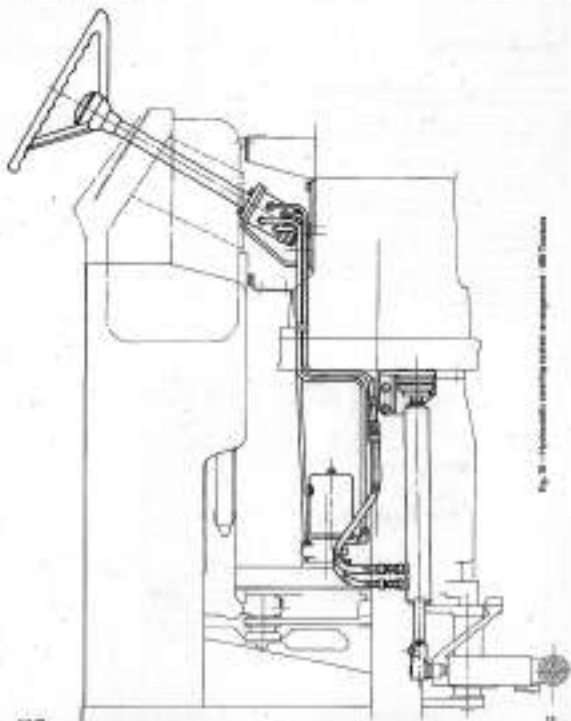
Hydroassist steering system arrangement - 600 Trucks
